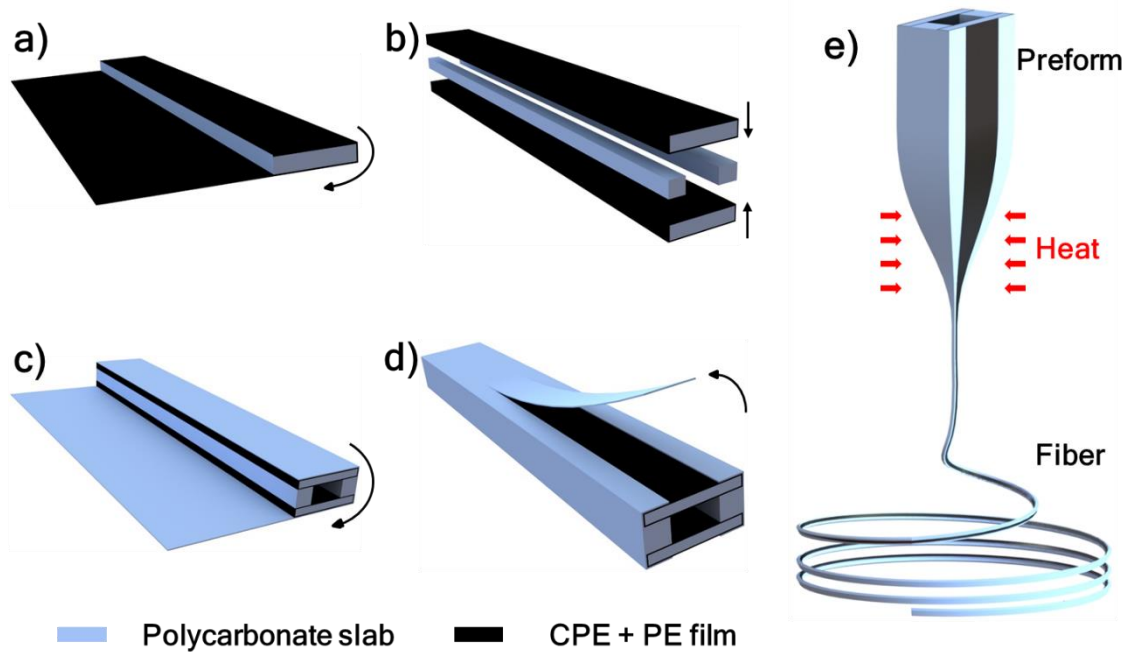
Schematics of preform assembly and fiber thermal drawing.
